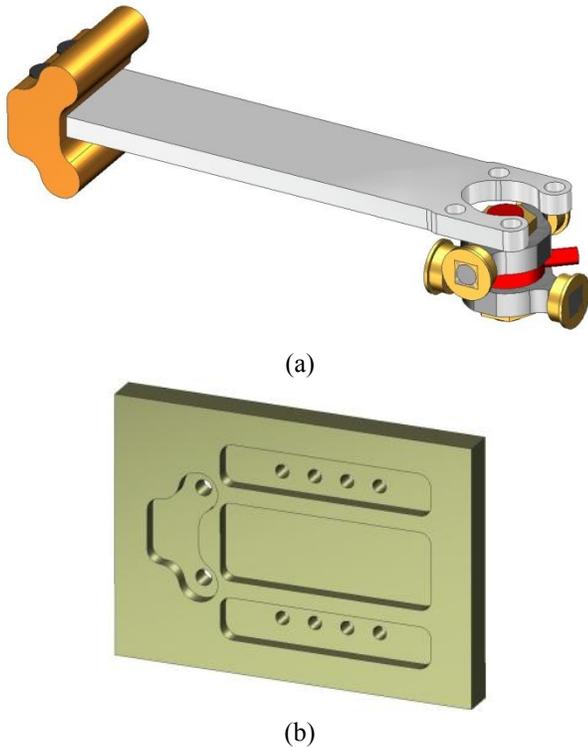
Cantilever Spring with fixed adapter (a), base pattern which can be machined into any part on the robot (b).
